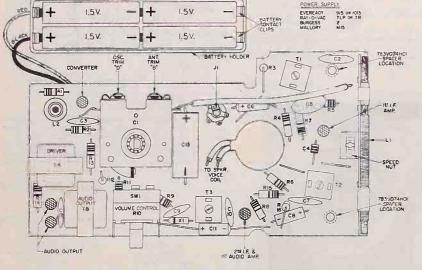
TOP VIEW OF PRINTED CIRCUIT CHASSIS
